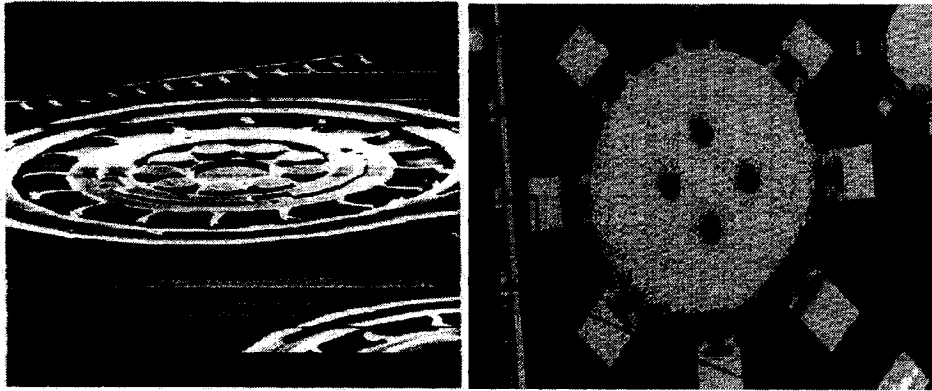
Two examples of complex geometries generated using conventional CAD drawing tools.
